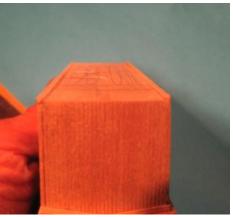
Here's the result. You can see the over hang on the sides and also the monofilament truss rods laying slack.
